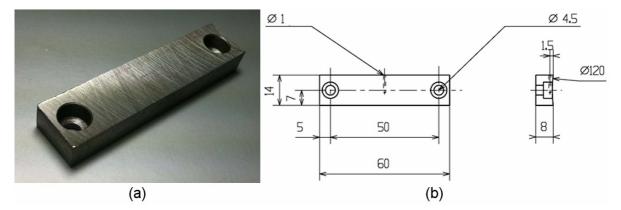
(a) Perspective view and (b) technical drawing of plates prepared for tests
